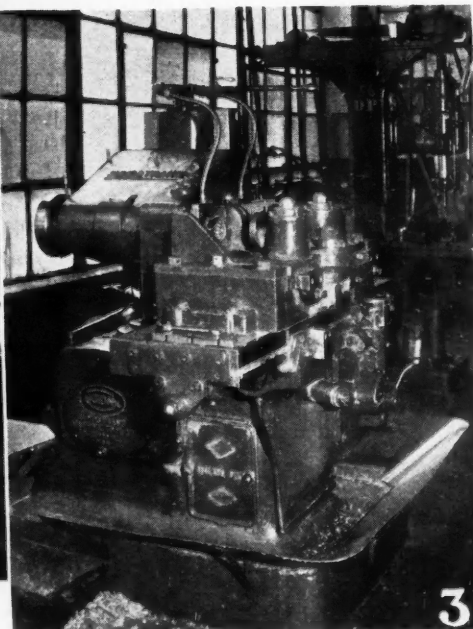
No. 30 Sundstrand Hydraulic Rigidmil with special two-spindle head
